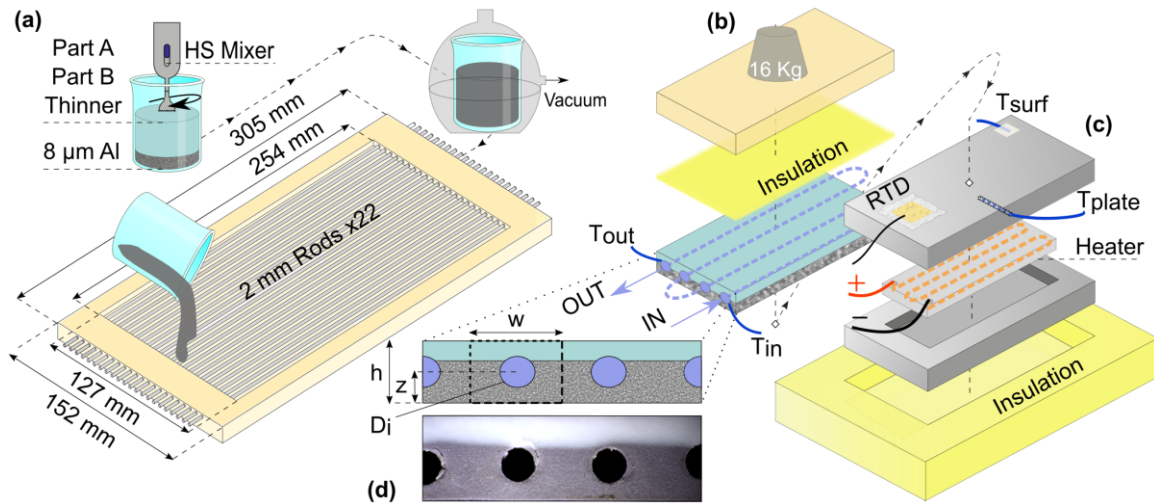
Illustrations of a) the casting procedure and the dimensions of the mold, the exploded view of b) the experimental setup and c) the hotplate configuration with sensor placements indicated, d) photograph and schematic cross-sectional view of the device, with indicated dimensions ($h = 4 \text{ mm}$, $z = 2 \text{ mm}$, $D_i = 2 \text{ mm}$ and $w = 5.5 \text{ mm}$).
